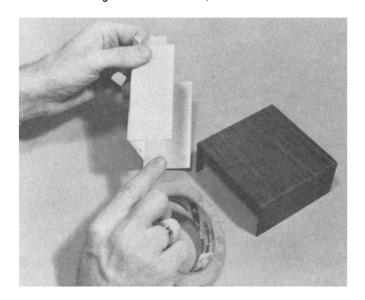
Apply masking tape to the front and back of the enclosure to protect its finish while marking and cutting all necessary holes.
